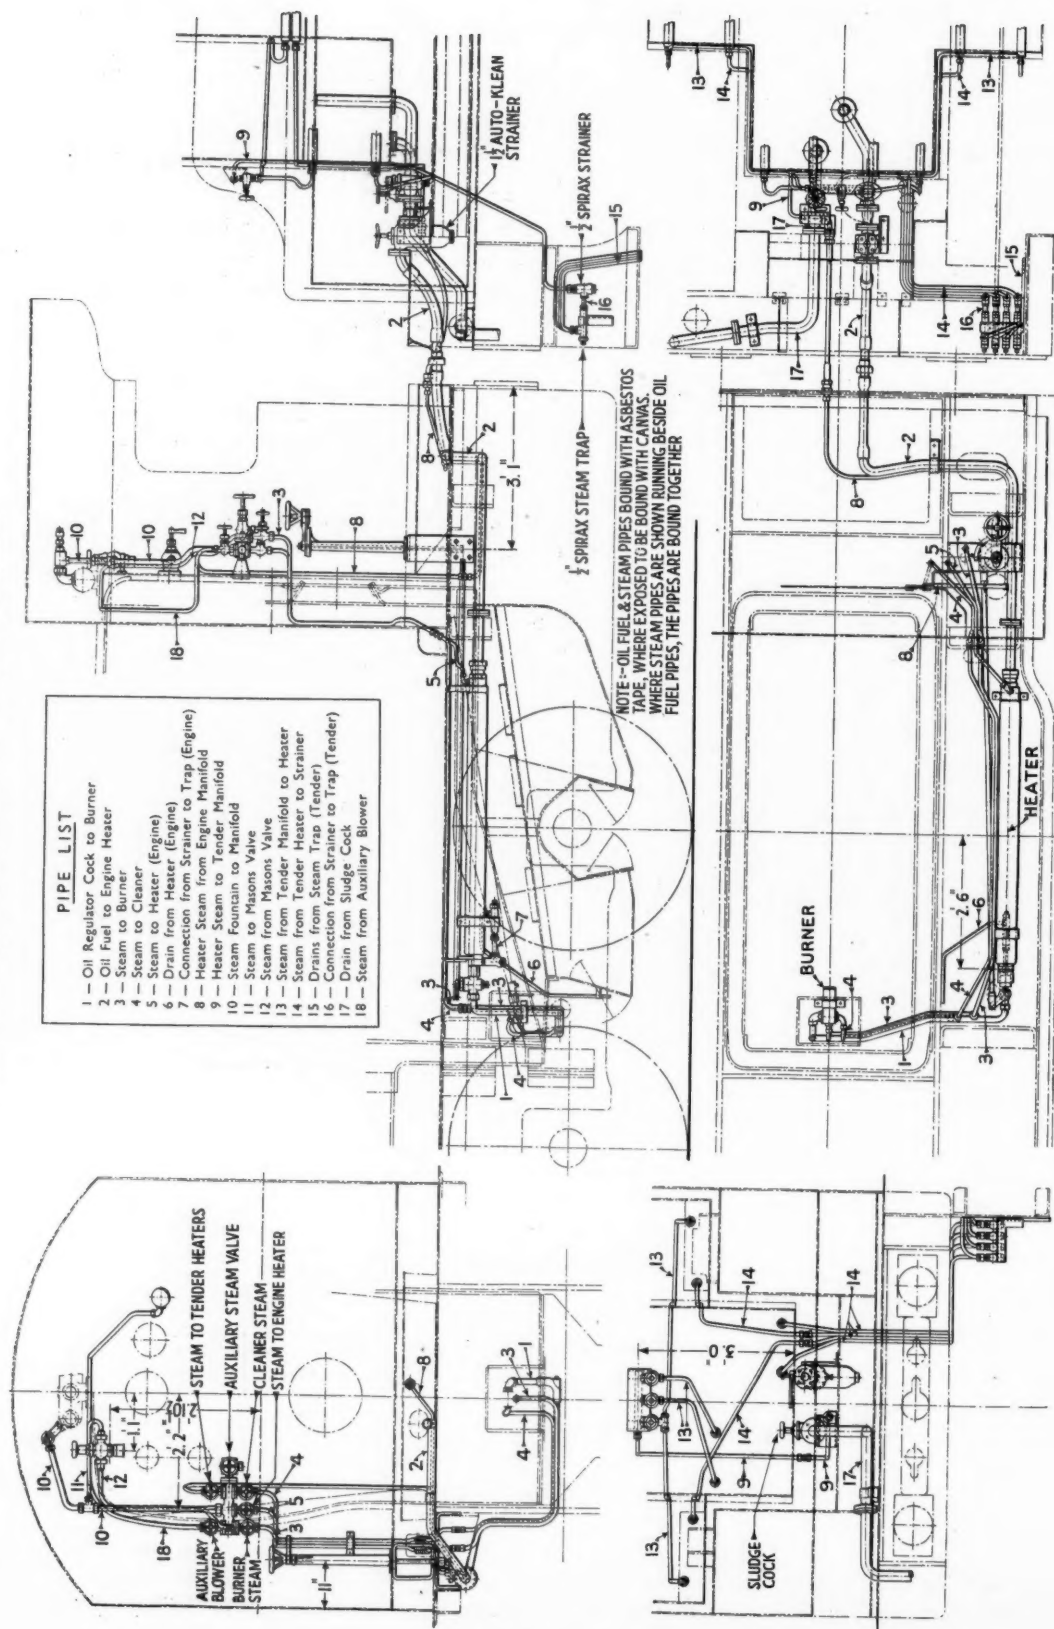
Arrangement of piping and gear for oil fuel, "2800" class locomotives, G.W.R.
